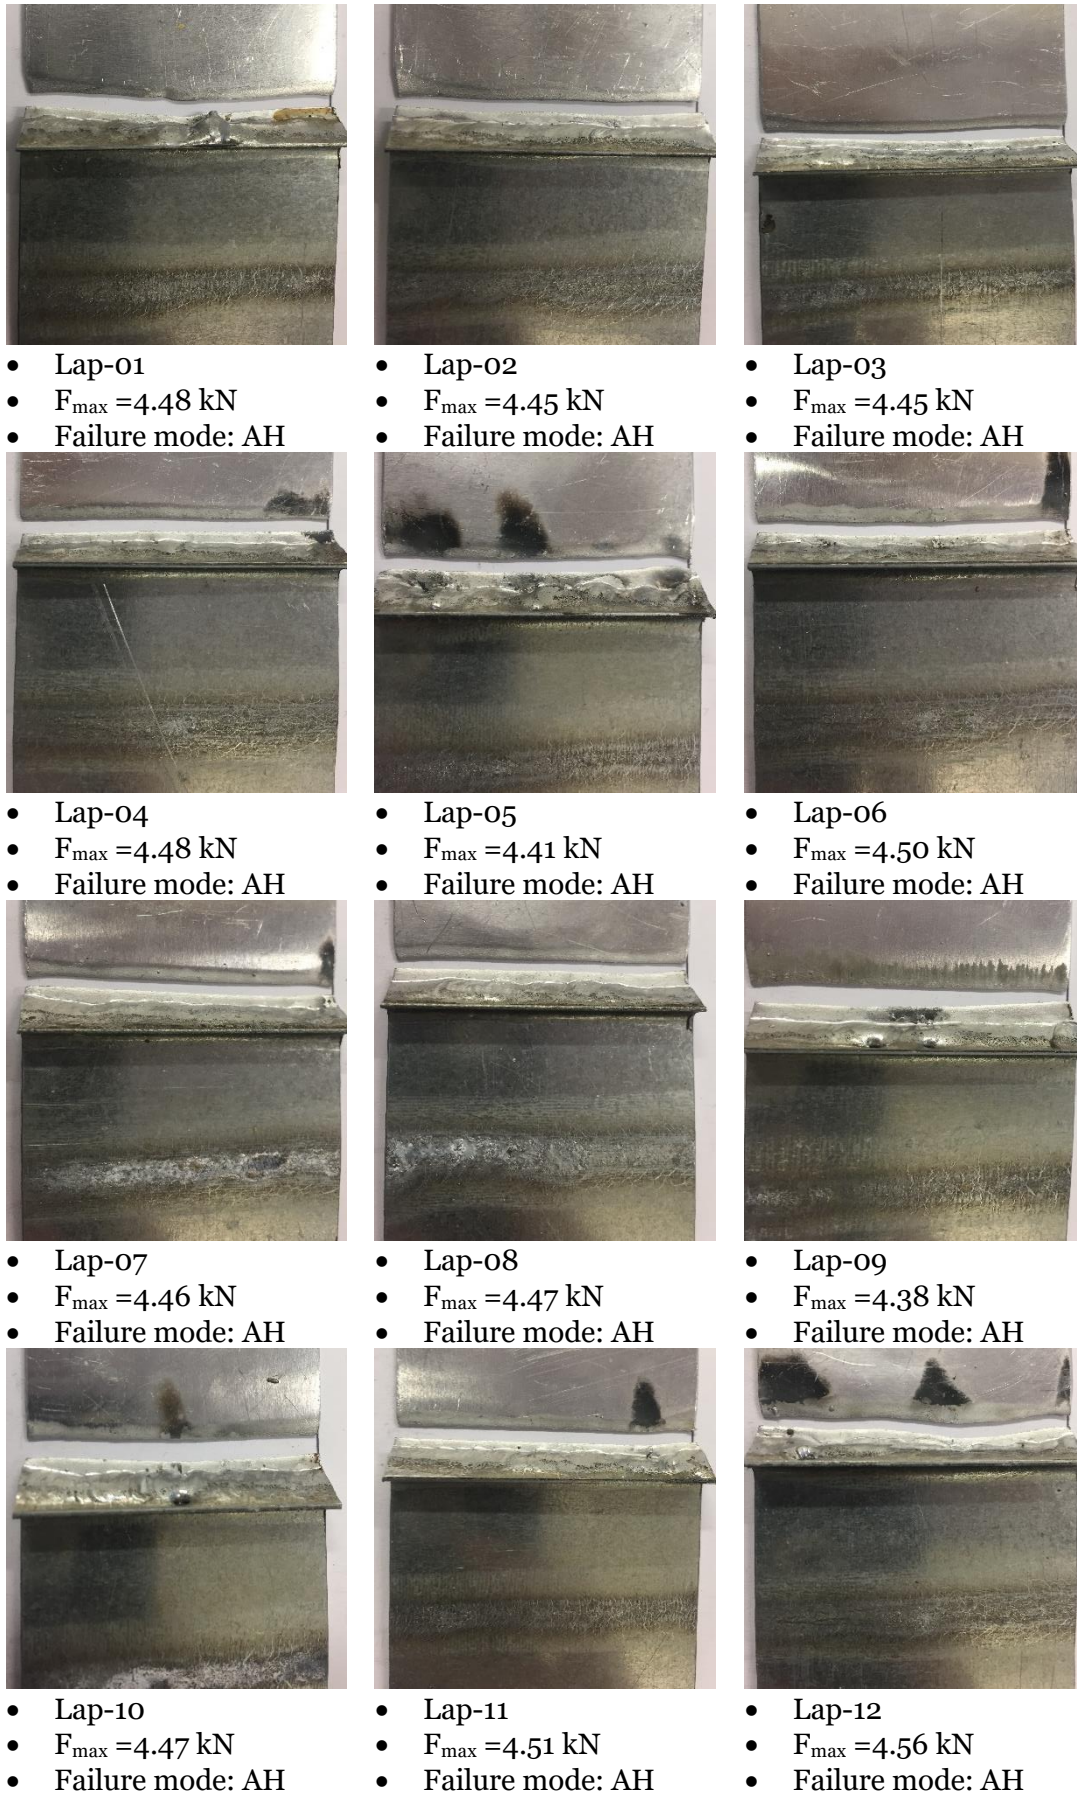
Tensile static failure of lap-welded joints (short-term).
